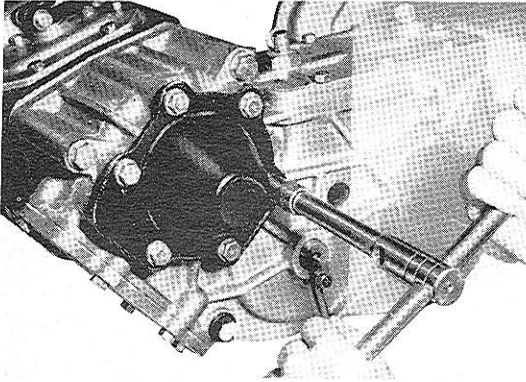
Removing Case V0433 Cover Attaching Bolts
